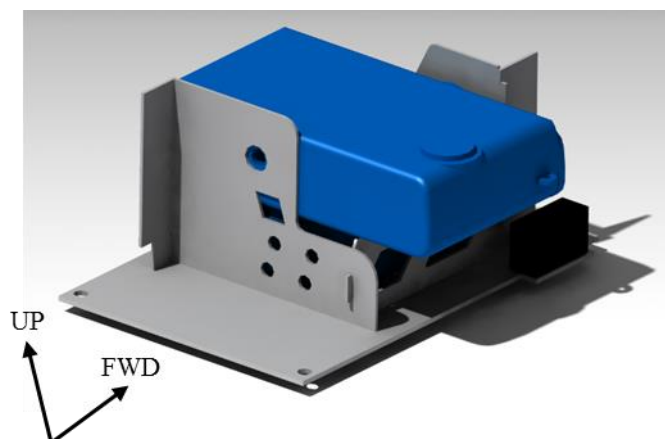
CAD model of the fixed-wing UAS payload subassembly
